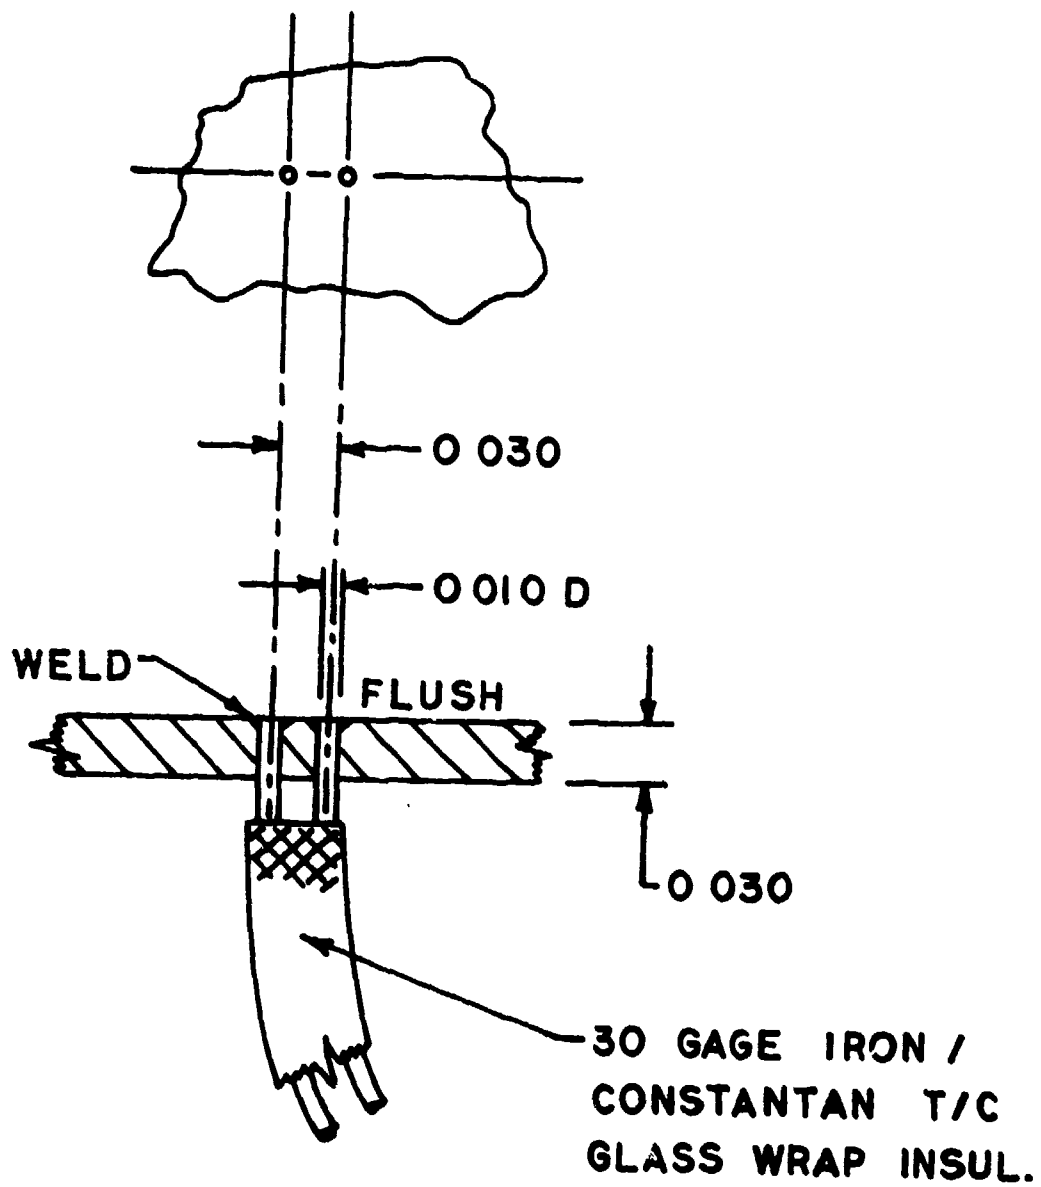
THERMOCOUPLE INSTALLATION DETAILS
